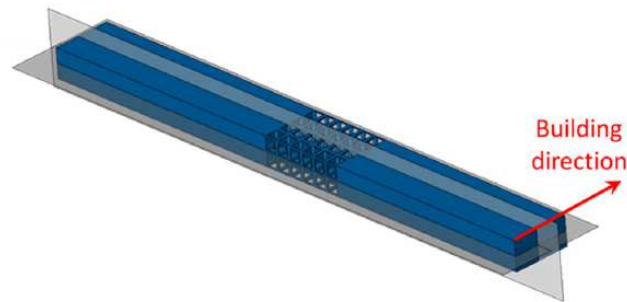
CAD model of 316L specimen integrating BCC lattice [64]
